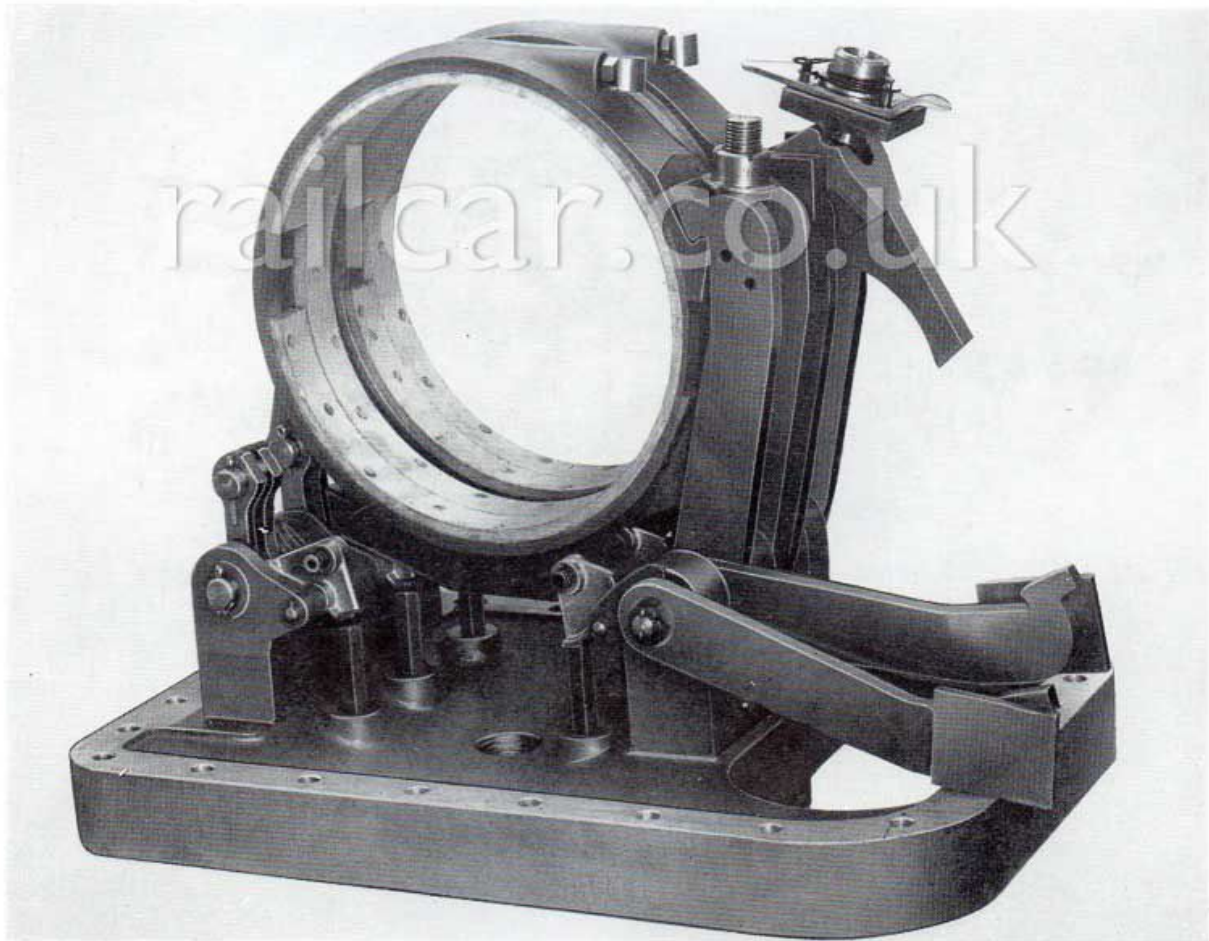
VIEW OF BRAKE BAND ASSEMBLY, HOOKS, CENTRALISERS AND BASE PLATE.
